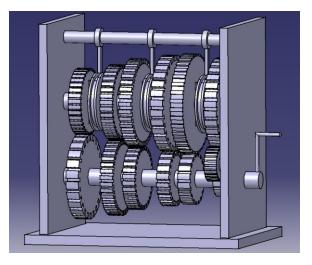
CATIA Model of Six speed constant mesh Gearbox
